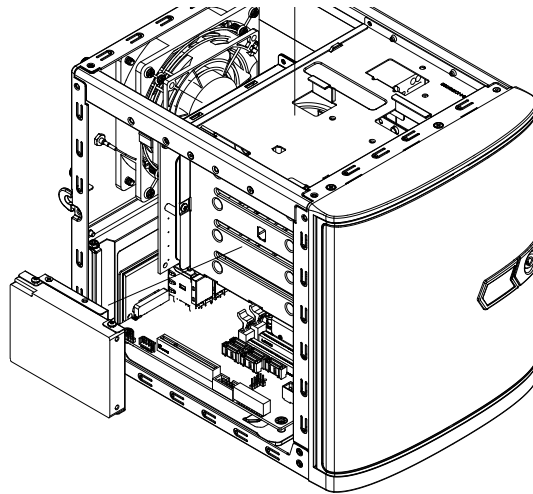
Installing a Side-Mounted Fixed Hard Drive
